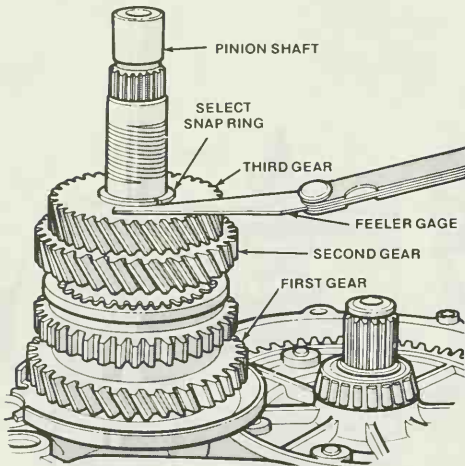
Measuring end play between third gear and select snap ring. (Chrysler Corporation)
